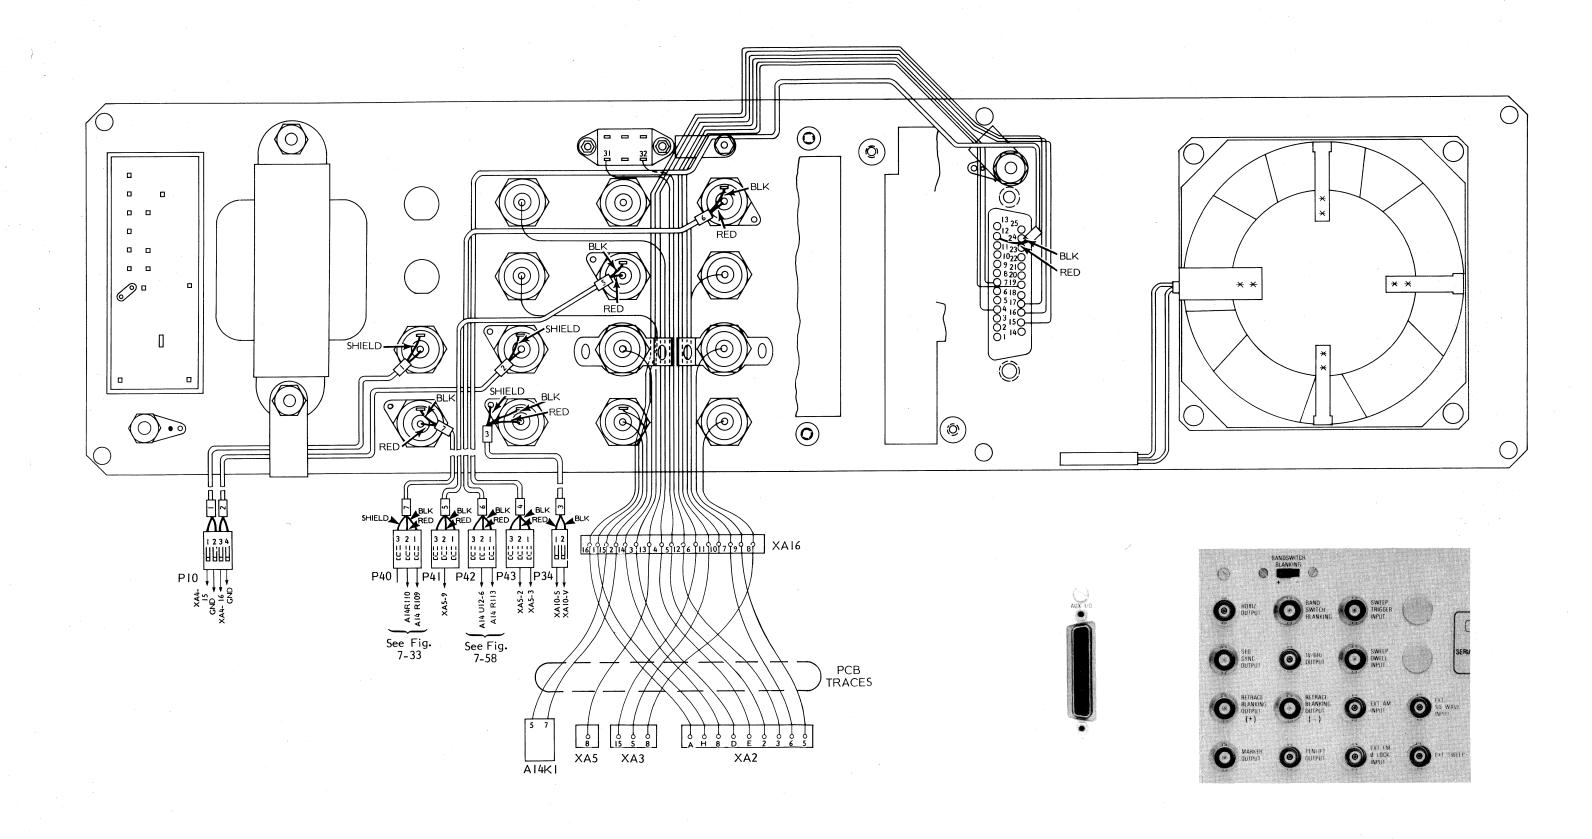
A. Rear Panel Wiring (Sheet 1 of 2)
